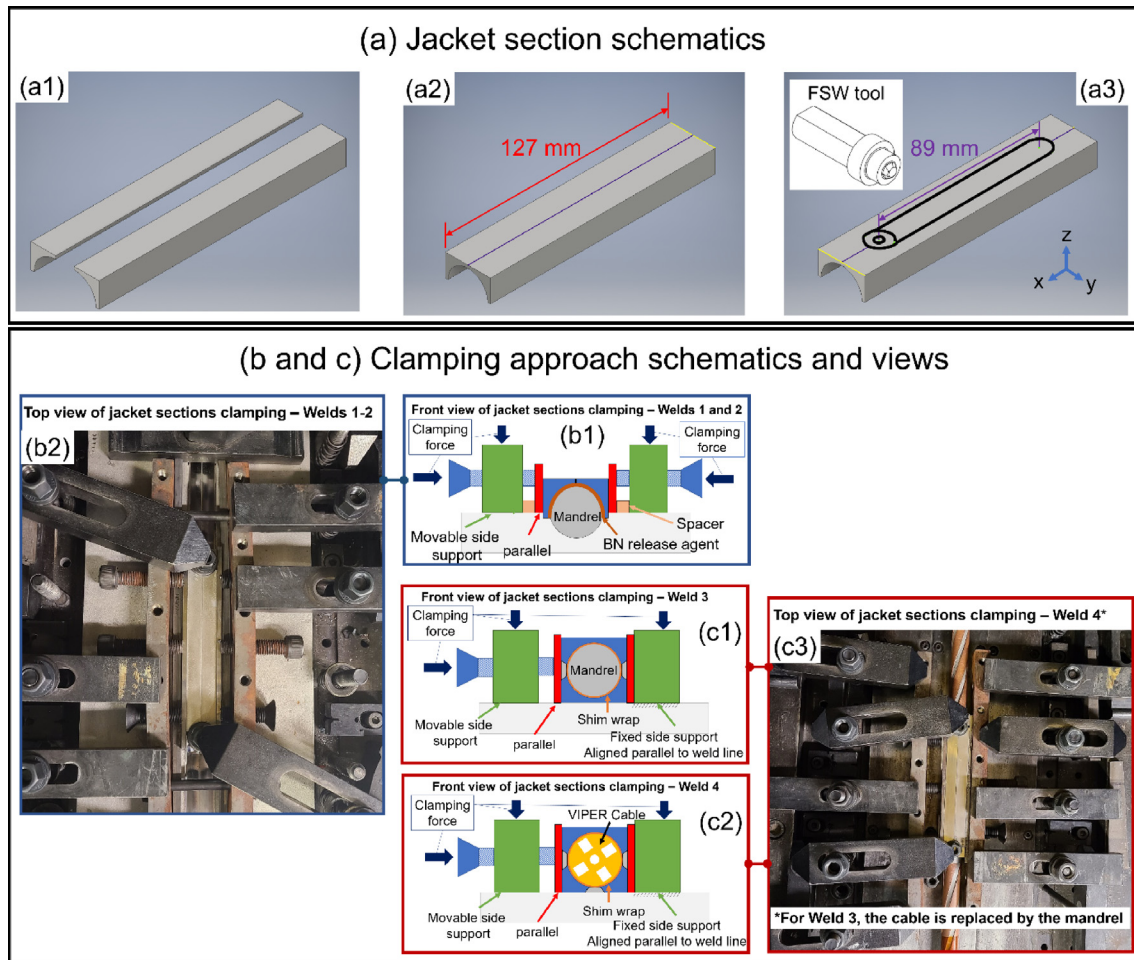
(a) Jacket sections schematics, (b) & (c) schematics and views of the clamping approach.
